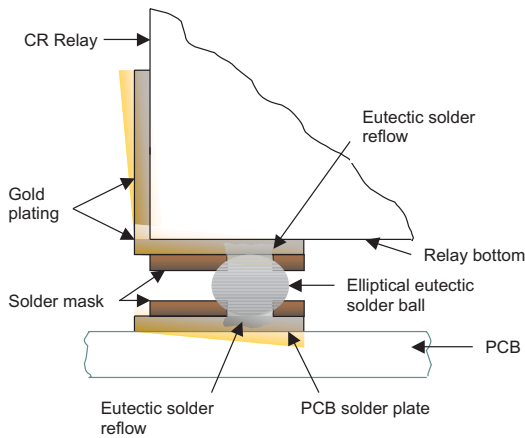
The CR relay has undergone solder reflow connecting the gold pads of the relay with eutectic solder to the solder ball. The solder ball is also connected to the PCB with eutectic solder.
